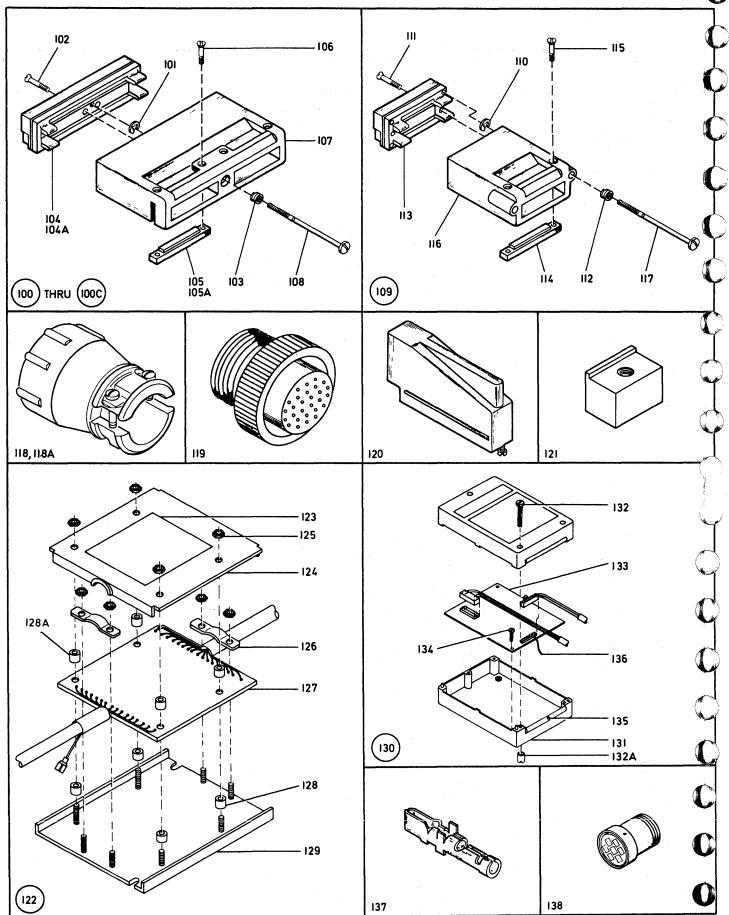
CABLE ASSEMBLIES WITH COMPONENT PARTS (SHEET 5 OF 6, INDEX NO. 100 THRU 138)
